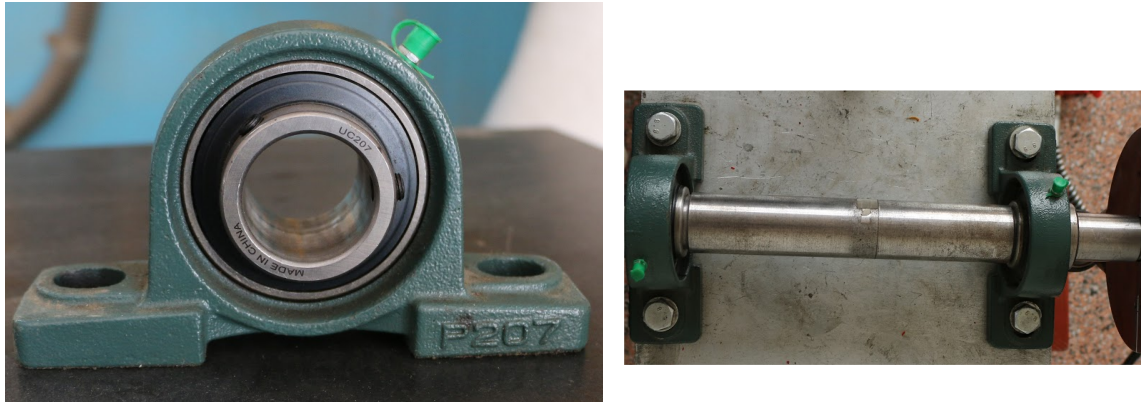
Pillow block bearing (left), Pillow bearing assembled with the shaft (right)
